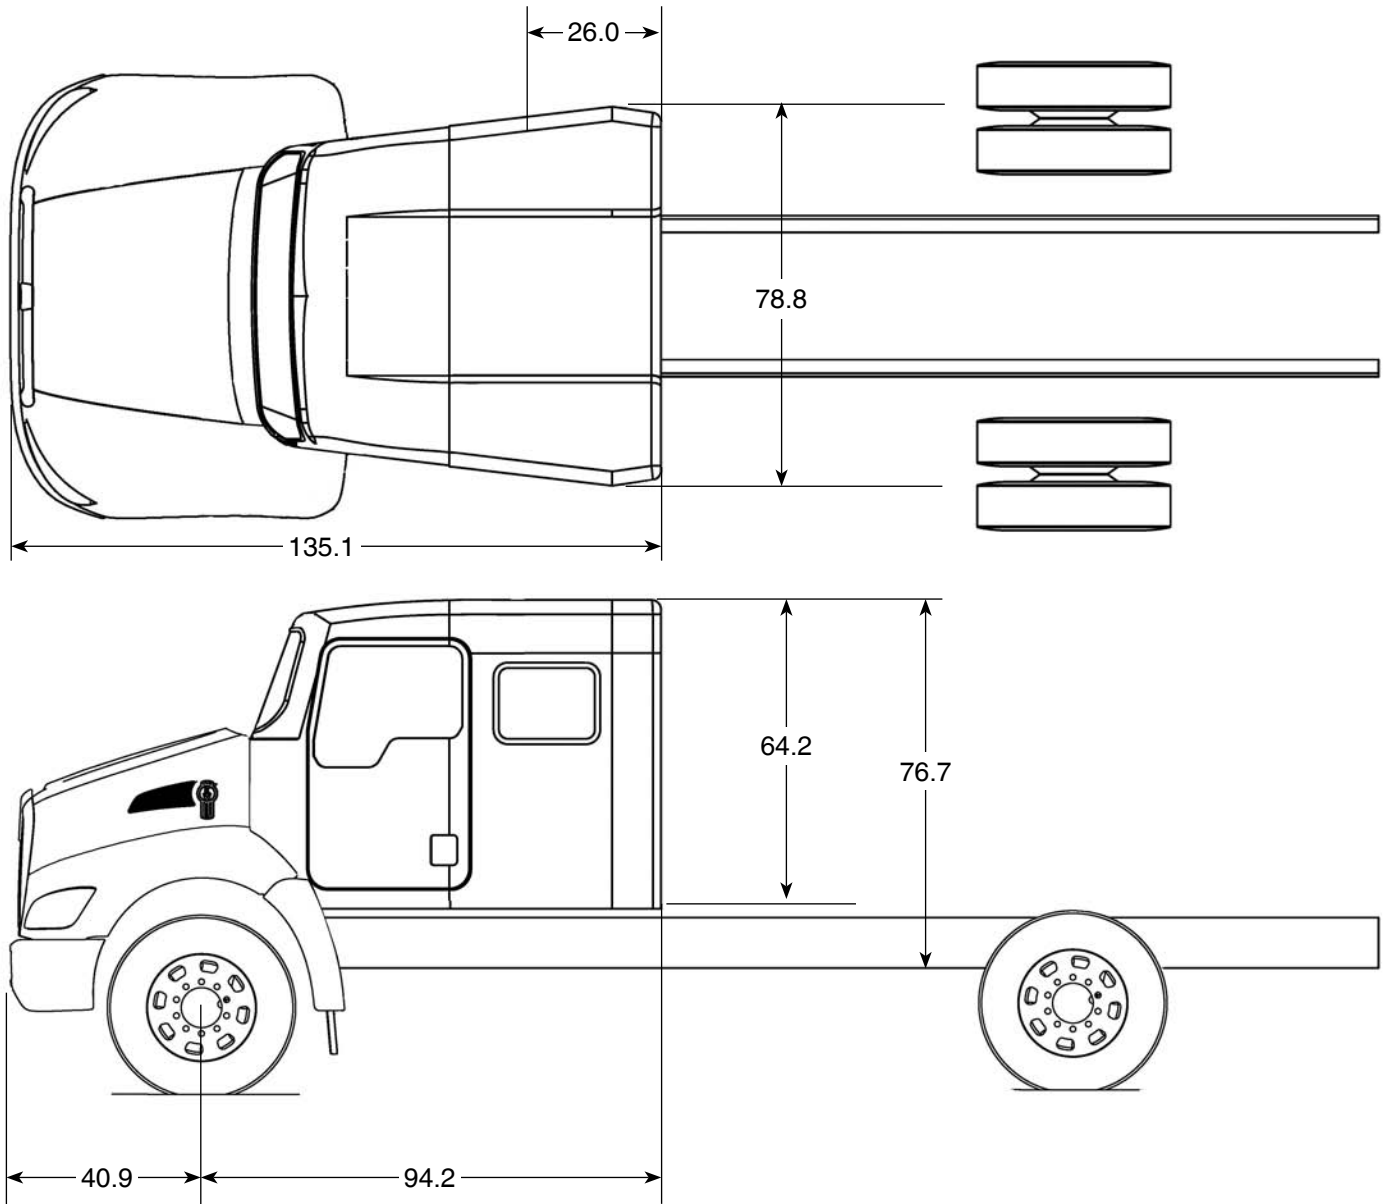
T170/T270/T370 Extended Cab, Overall Dimensions [inches (mm)]
